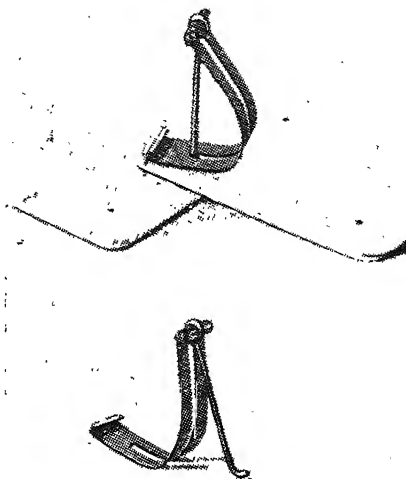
The General Aircraft rivet clamp is of the spring-bow type.
